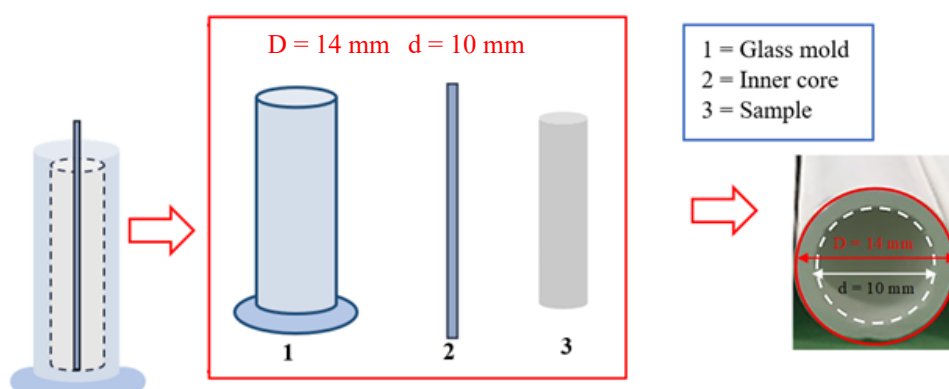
Schematic drawing of glass molds and Al_2O_3 tubes after sintering.
